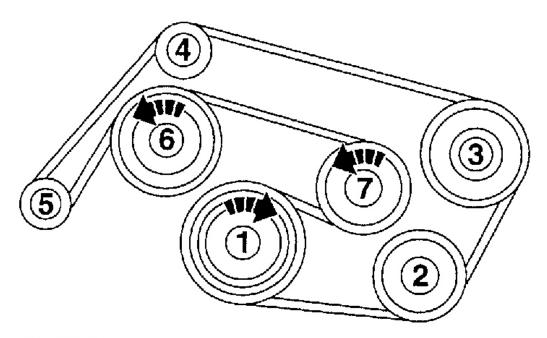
Identifying Drive Belt Routing Courtesy of DAIMLERCHRYSLER CORP.
